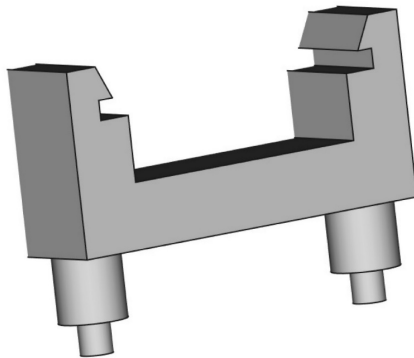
3D-printed prototype of the VTRx+ standoff for the FEB2 board.
